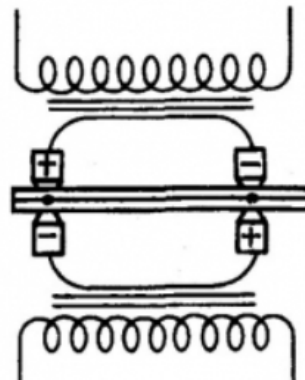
Schematic layout for push-pull welding [7].
